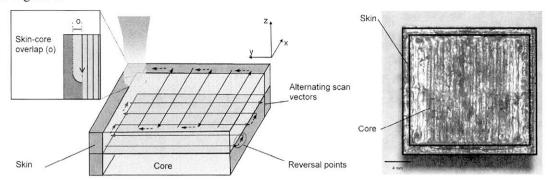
Schematic representation of skin-core overlap (left), Skin-core specimen, top view (right)
